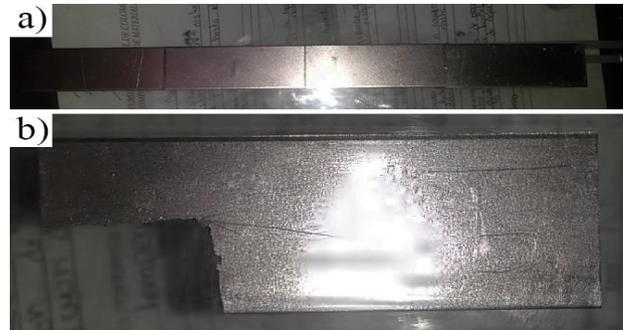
Structural steel sheet grade A-36. 2b. Sheet after cutting process. Evaluated surface (transversal section) and heat affected zone resulted of the laser cutting.
